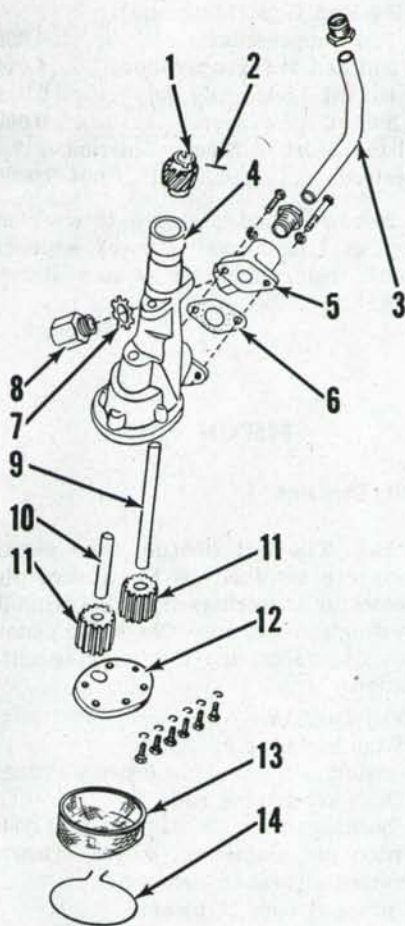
Exploded view of D-19 diesel and non-diesel oil pump assembly. Relief valve (8) is non-adjustable and is used to prevent surge pressures only. Normal oil pressure is controlled by relief valve shown in Fig. AC31.
